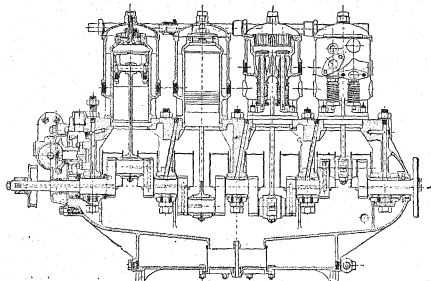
Four-cylinder Petrol Engine (sectional elevation)
